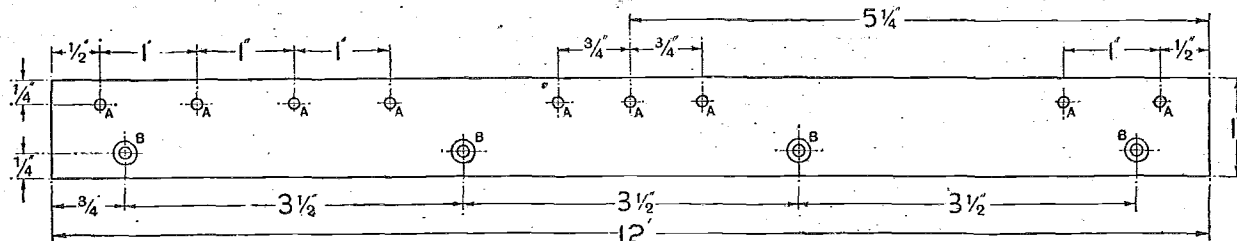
Dimensions of terminal strip. The holes are drilled as follows: A, No. 4B.A. tapped; B, $\frac{3}{8}$ in. dia., countersunk for No. 4 wood screws.
